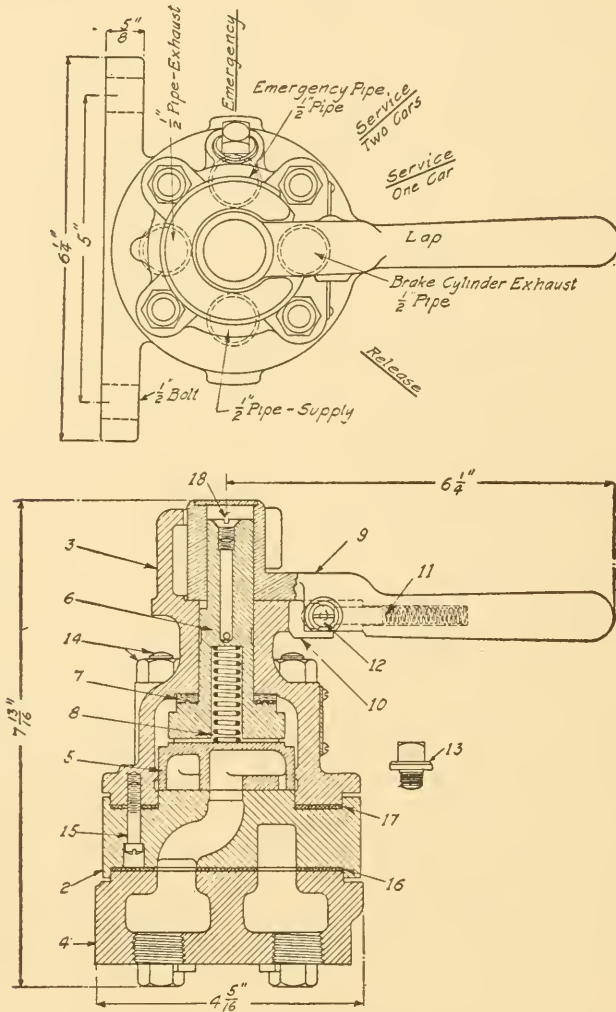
Westinghouse "M-18" Brake Valve in Plan and Actual Section
